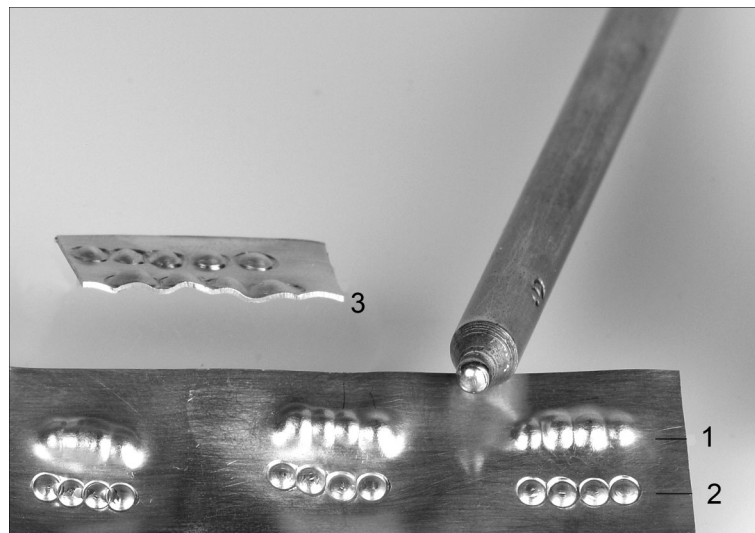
Production plates for the finishing of the exterior pearl rim. 1 half pearls, embossed with ball embossing tools from the rear side, 2 refinished from the front side with hollow embossing tool, 3 side view. Photo by Sabine Steidl, RGZM.
